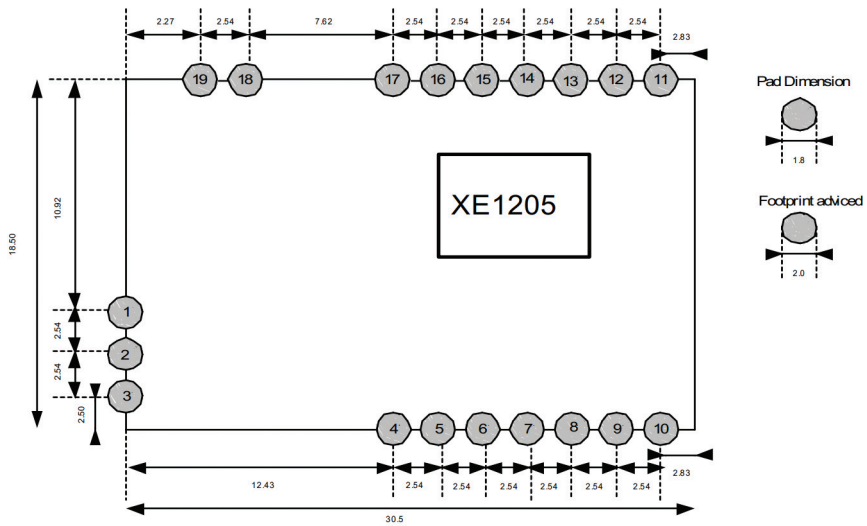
TRM-xxx-DP1205 Mechanical Dimensions
